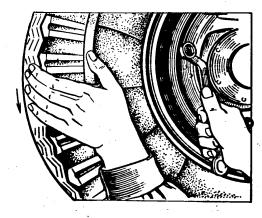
Adjusting Shoe-to-Brake Drum Clearances of Rear Wheel
